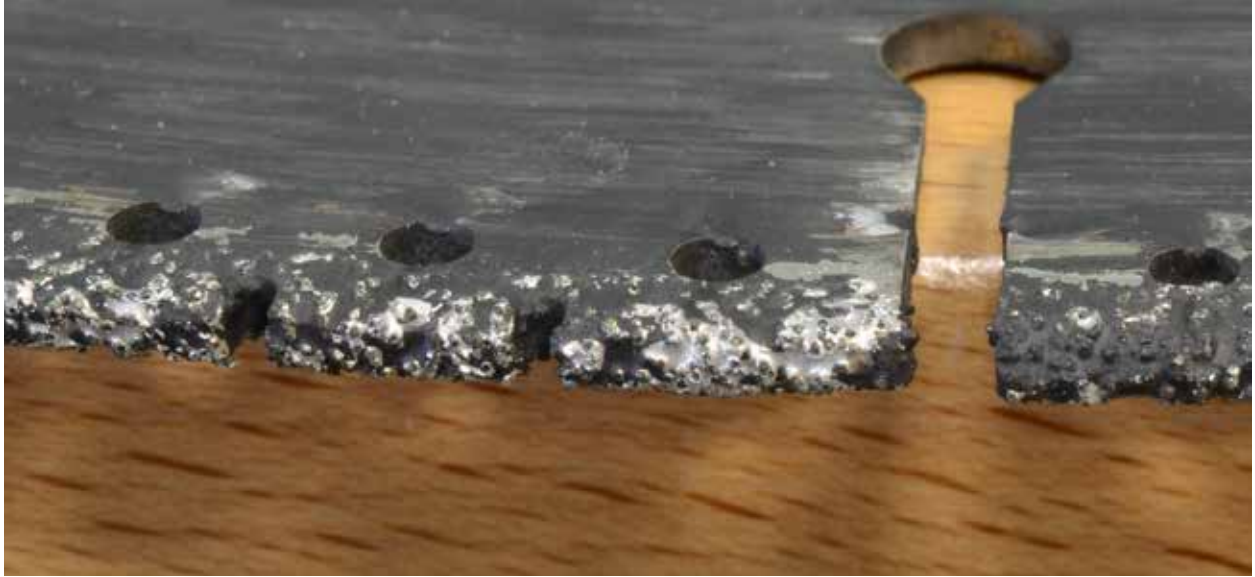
Diamond Saw Blade, AL06, Wet Cuts
